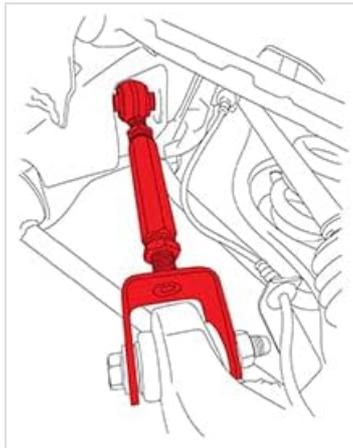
Installation Diagram. A line drawing illustrating the placement of the SPC Performance 67405 Adjustable Rear Toe Control Arm (highlighted in red) within a vehicle's rear suspension assembly, showing its connection points.
